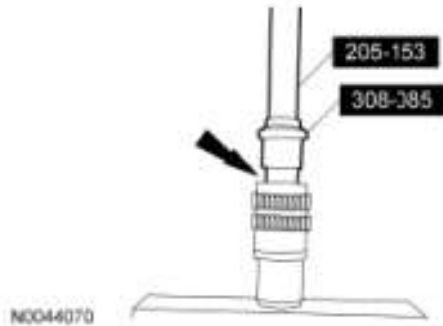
Locating Needle Bearing Using Input Shaft Bearing Installer
